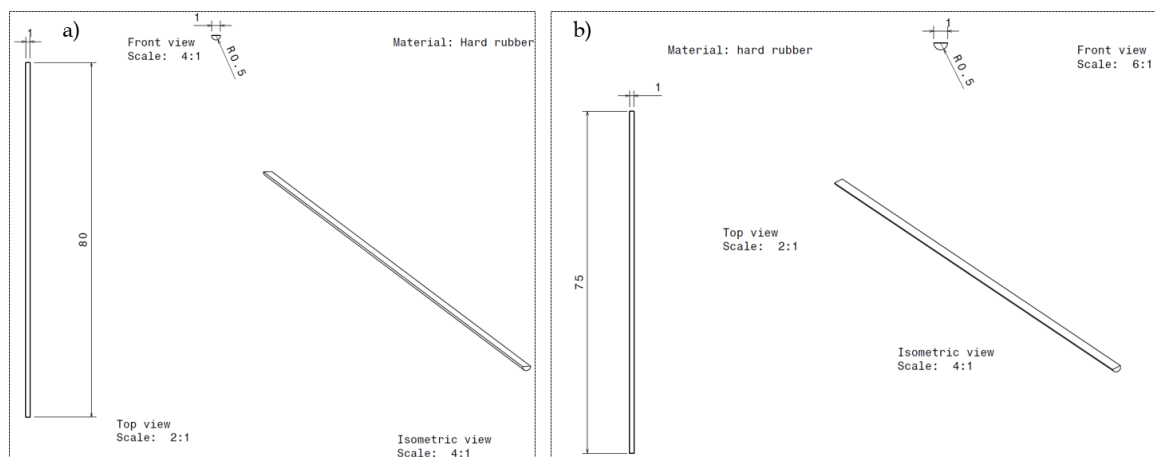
Drawings of the rubber slices for the closing element of the a) fixed part and b) moving element.
